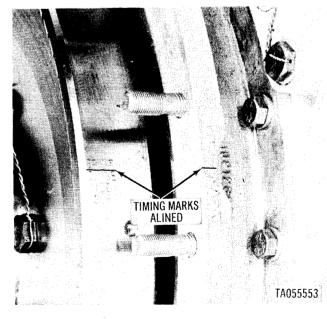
Flywheel timing mark alined for valve timing - right bank of cylinders, model AVDS-1790-2DR engine.
